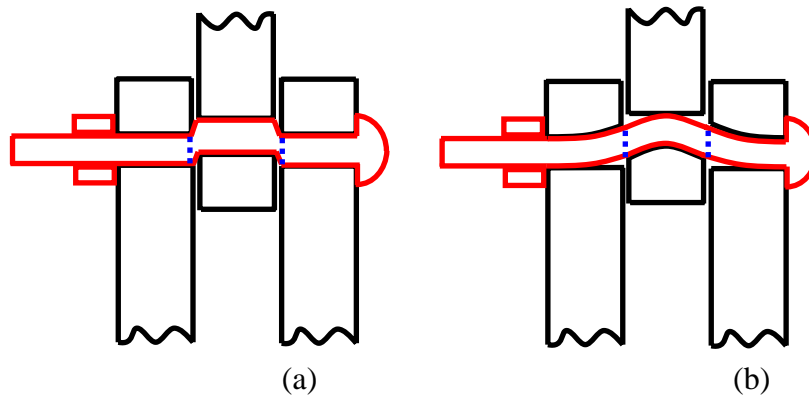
(a) Perfect Shear with Undeformed Fixture; (b) Shear and Tension Failure with Deformed Fixture;
